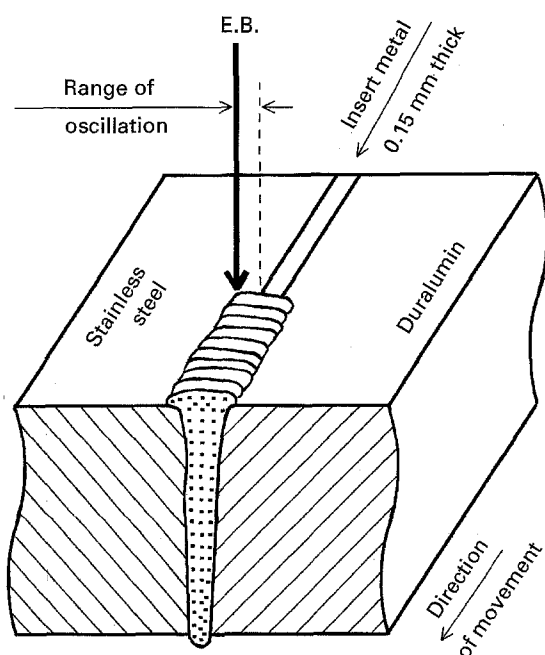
The principle of EB welding of stainless steel with duralumin by the use of a Ag-2 wt % Mg filler metal shim.
